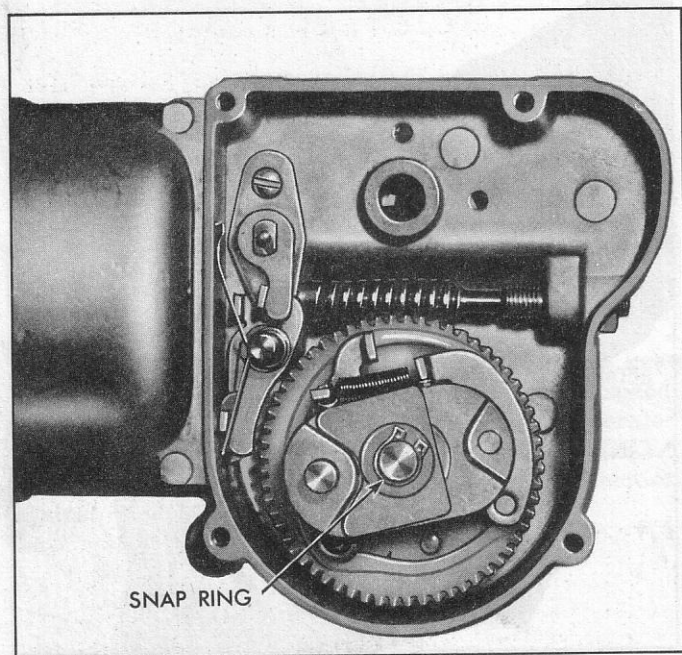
Gear Cover and Connecting Linkage Assembly Removed
